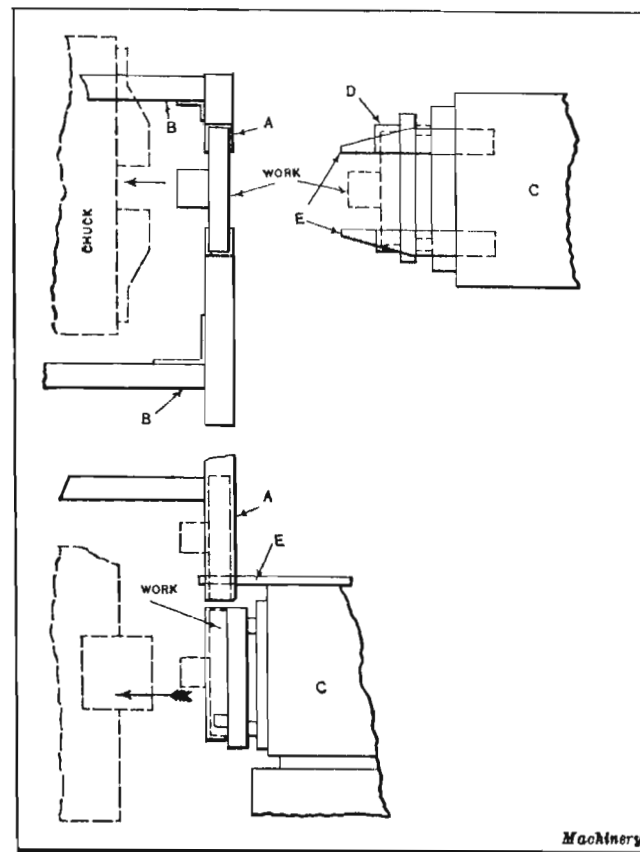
Turret Lathe Magazine Placed Directly Over the Spindle
